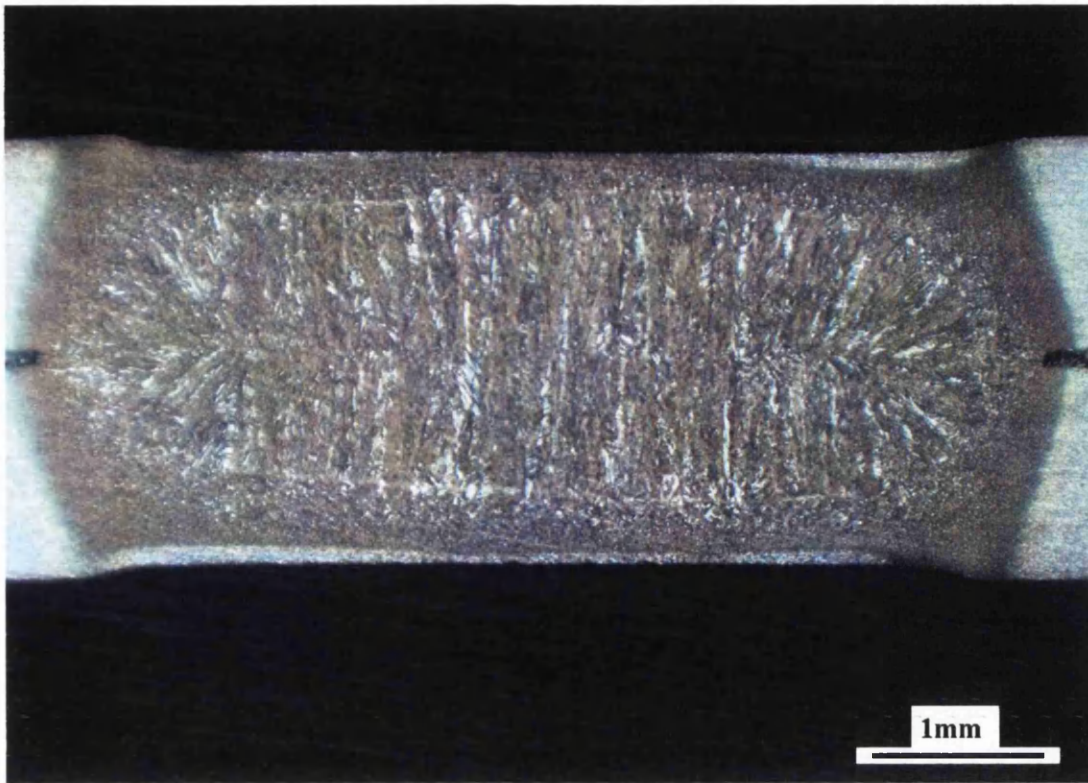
Macro of $5\sqrt{t}$ spot weld formed in 1.2mm DP600
